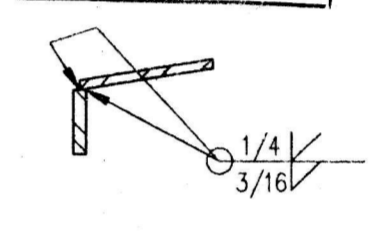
DETAIL (TYPICAL ANCHOR WELDMENT) 1
